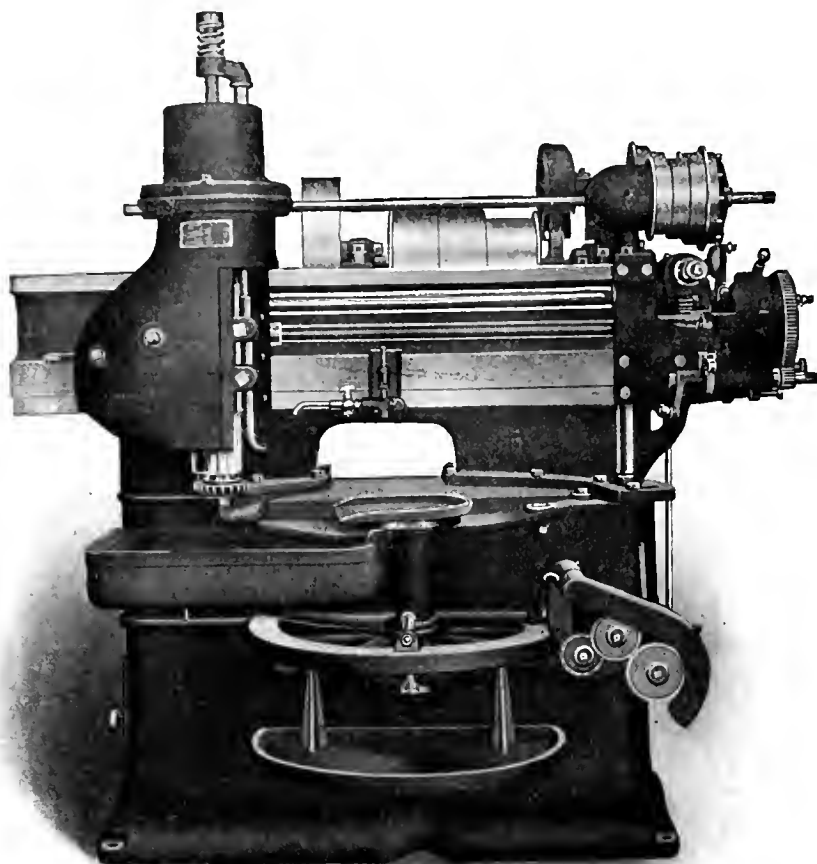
The Feed-gear Box and Universal Joint Shaft
